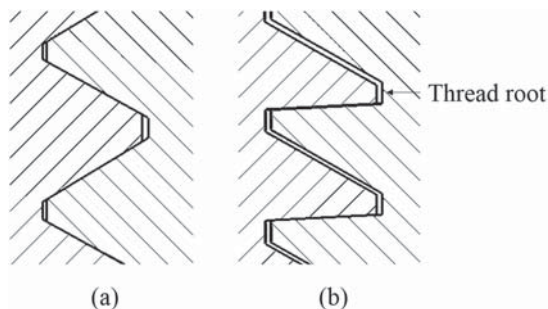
Schematic drawing of a standard metric ISO profile (a) and a buttress (b) thread.
